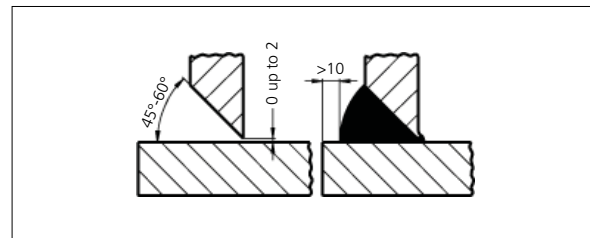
T-joint with single bevel groove with fillet weld
